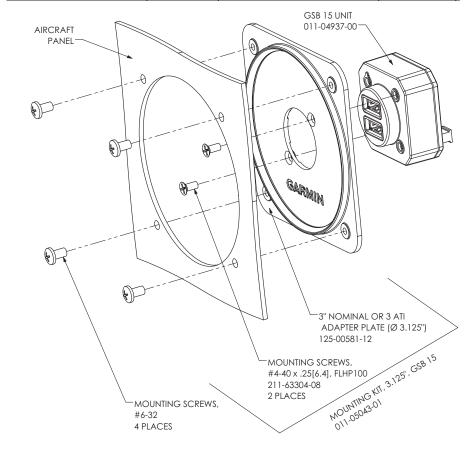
GSB 15 Panel Cutout Drawing (Pan Head and Flat Head Screws)
